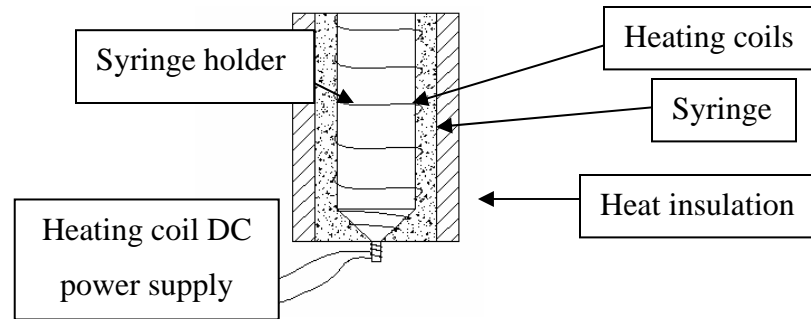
Schematic drawing showing the syringe and nozzle heating system.
